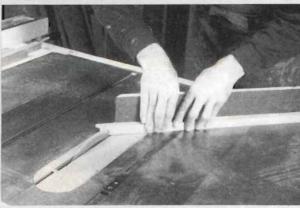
Photo B: Hold the molding firmly as you cut to prevent the force of the saw from pushing the piece back slightly.
